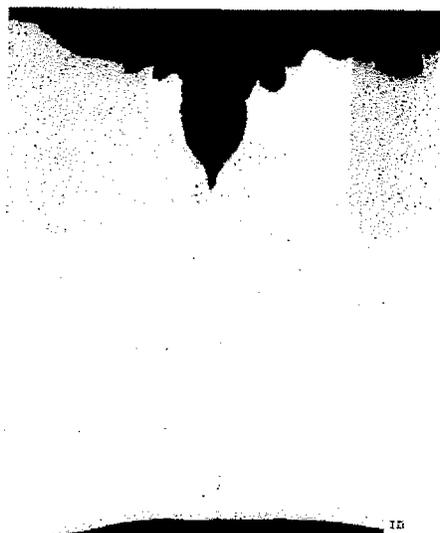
Selective seam weld corrosion viewed in cross section
